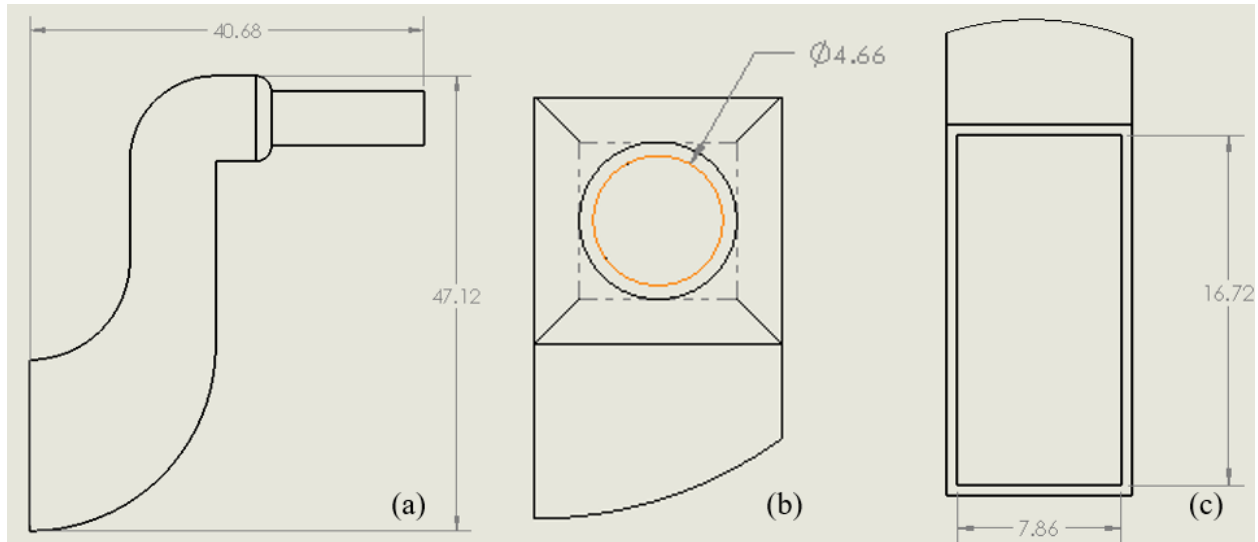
Dimensions of the NCAT OWC Chamber Prototype: (a) Side view showing the overall chamber height (~47.1 in) and length (~40.7 in); (b) Outlet view showing the circular air duct with a diameter of 4.66 in; (c) Inlet view showing the rectangular water intake with dimensions of 16.72 in (height) $\times$ 7.86 in (width).
